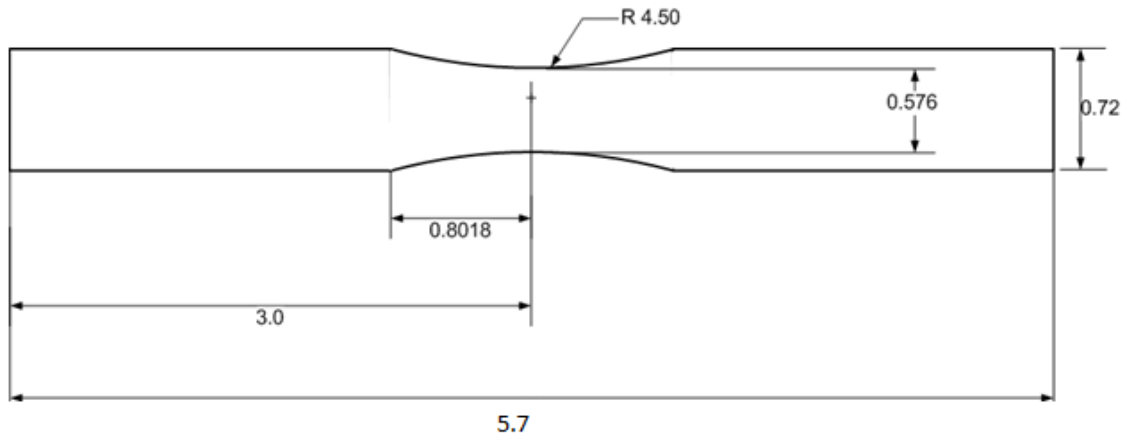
Tension-Compression Fatigue Test Specimen. All Dimension are in Inches. All Tolerances are ± 0.001 in.
